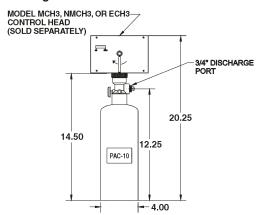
Model PAC-10 Pneumatic Actuating Cylinder.
